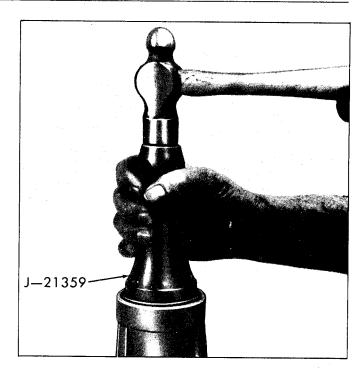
B-16K--Installing Drive Gear Bearing Retainer Seal
